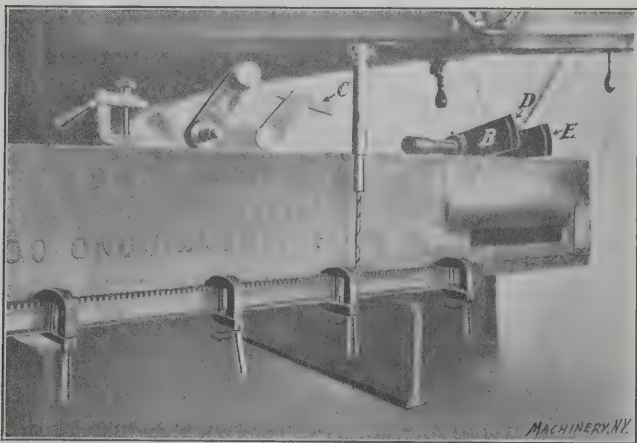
Special Clamps for Holding Rack in Position when Drilling, and Fixtures used for Locating Tumbler Locking Plate
